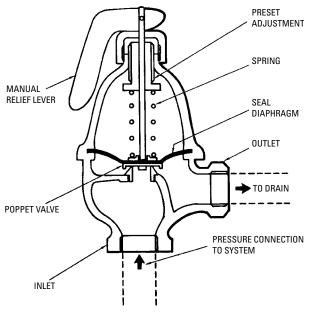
Principal components of a pressure relief valve. (Courtesy Robertshaw Controls Co.)
